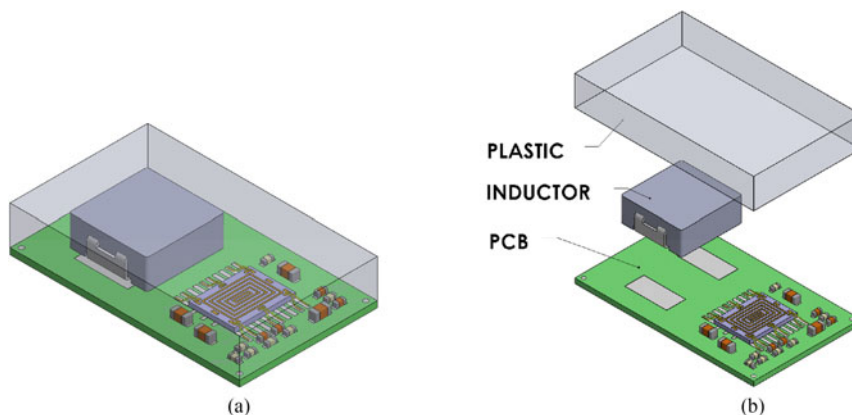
Conventional plastic packaging. (a) Transfer molding power module. (b) Internal structure.
